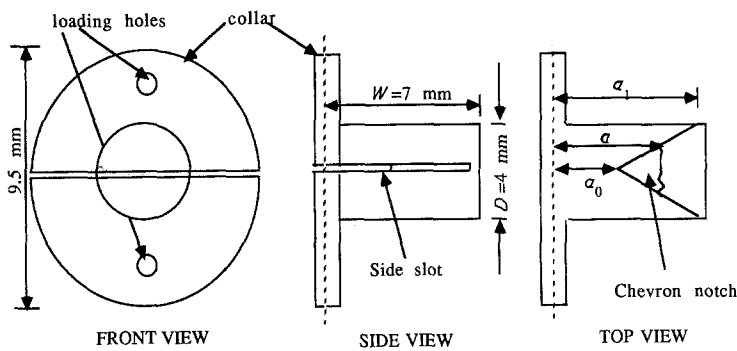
The geometry and the dimensions of the mini short-rod specimens.
